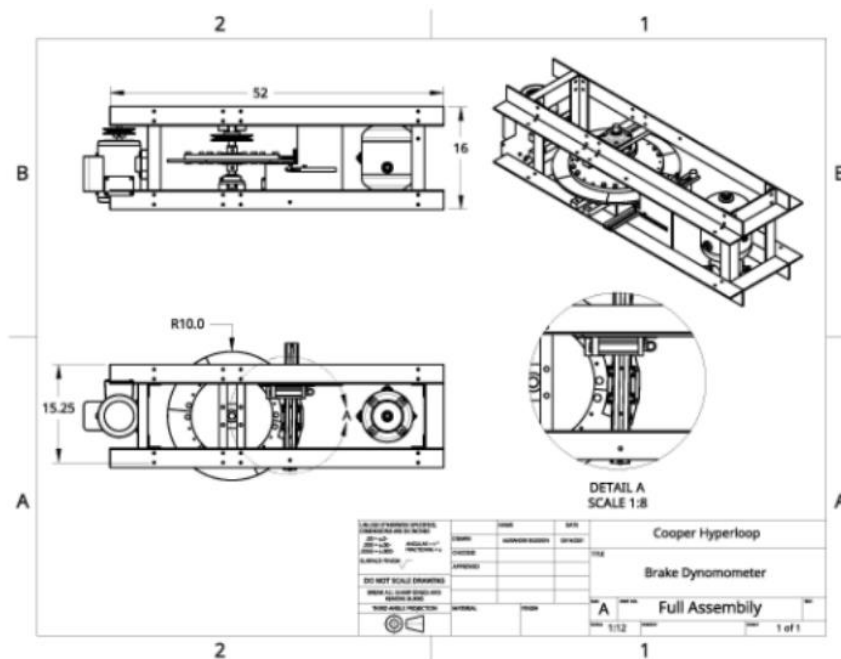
Drawing of the brake dynamometer (units in inches)
